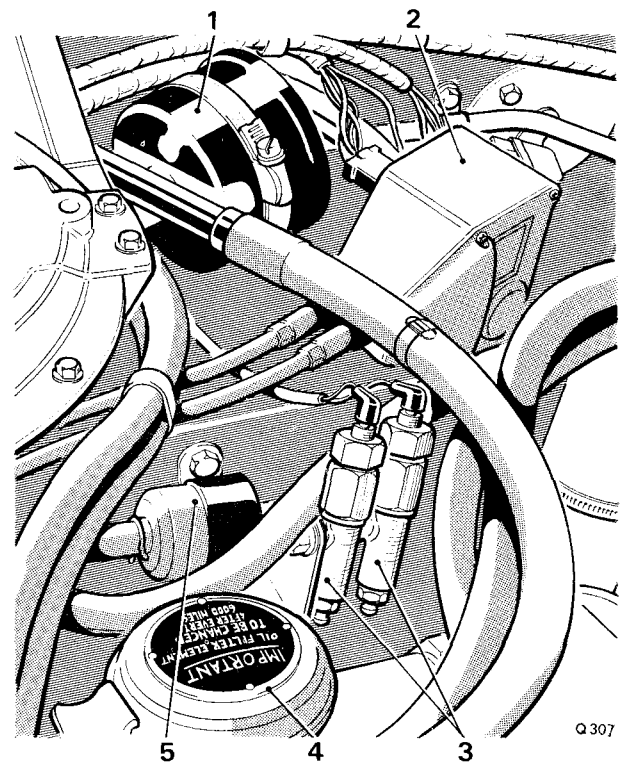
POSITION OF MIXTURE WEAKENING DEVICE FILTER AND PURGE LINE FILTER
